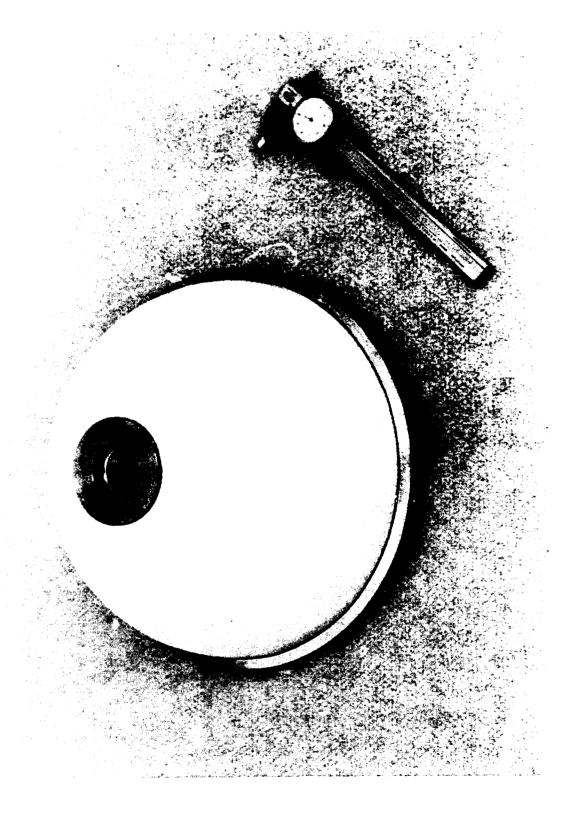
Ceramic bulkhead assembly Mod 2; exterior view.
